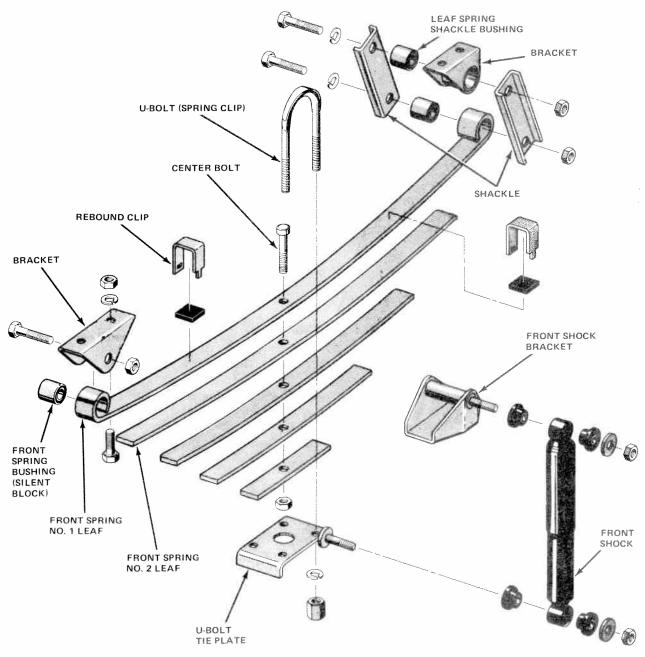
Front Spring and Shock Absorber - CJ Models
